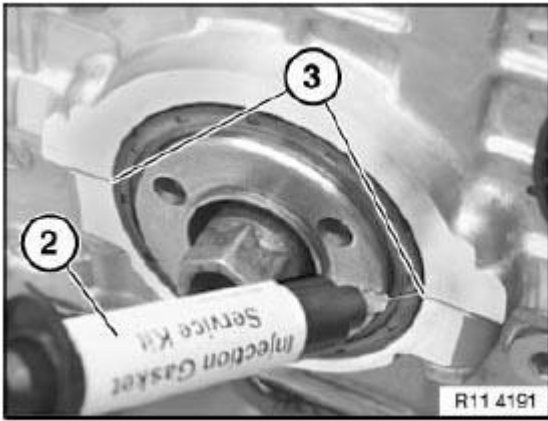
Injector And Grooves On Crankshaft Radial Seal
